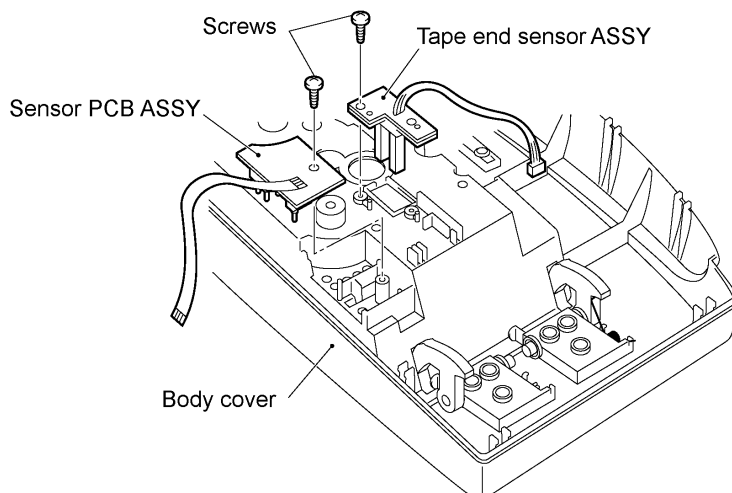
Removing the Tape End Sensor ASSY and Sensor PCB ASSY
